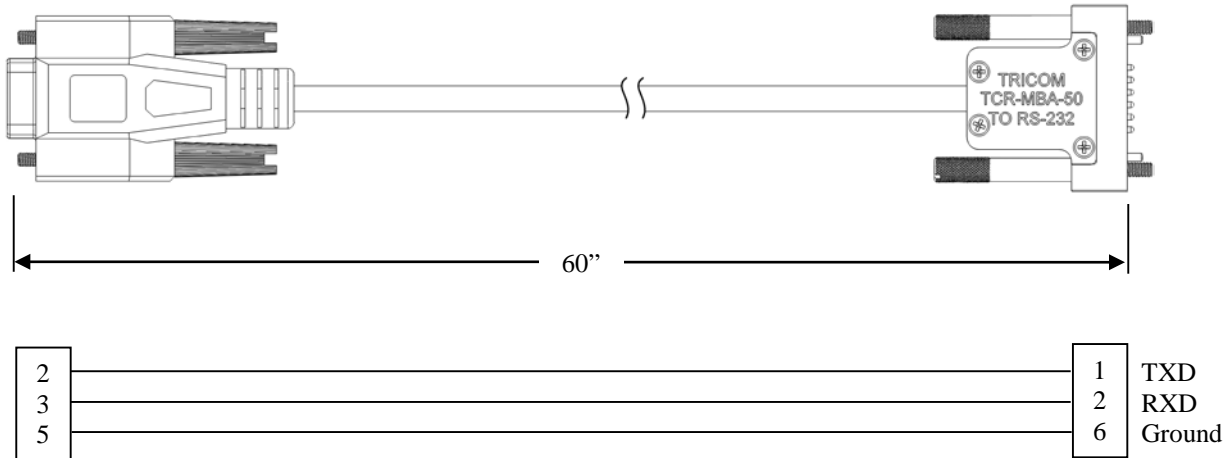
RS-232 Remote Control Cable (part number 77500-00390 optional)
